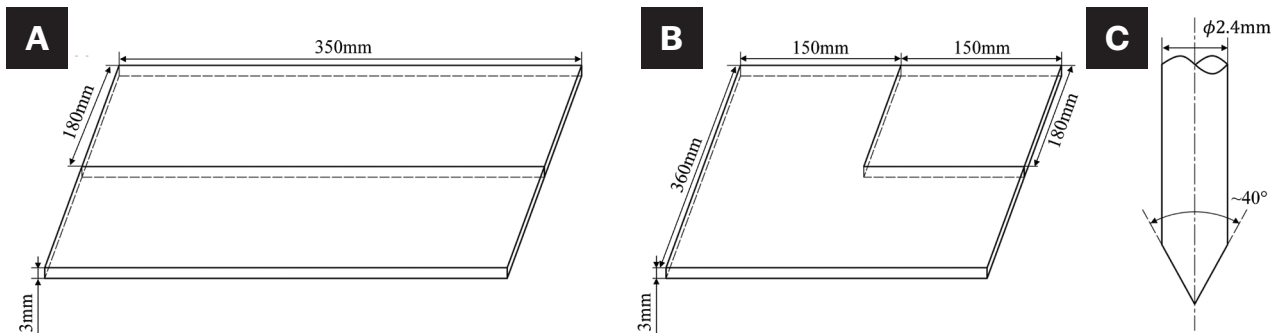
Shape and size of welding workpiece and electrode: A – Shape and size of straight-line welding seam base material; B – shape and size of right-angle line welding seam base material; C – shape and size of tungsten electrode.
